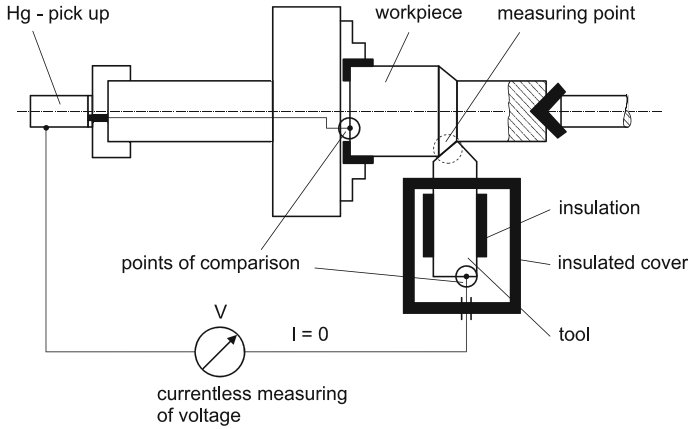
Temperature measurement, single-tool method [OPI52]
